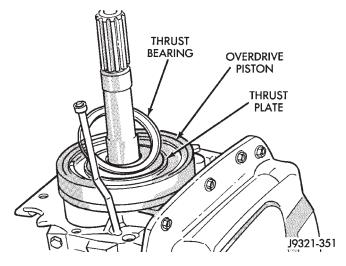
Overdrive Piston Thrust Bearing Removal/ Installation
